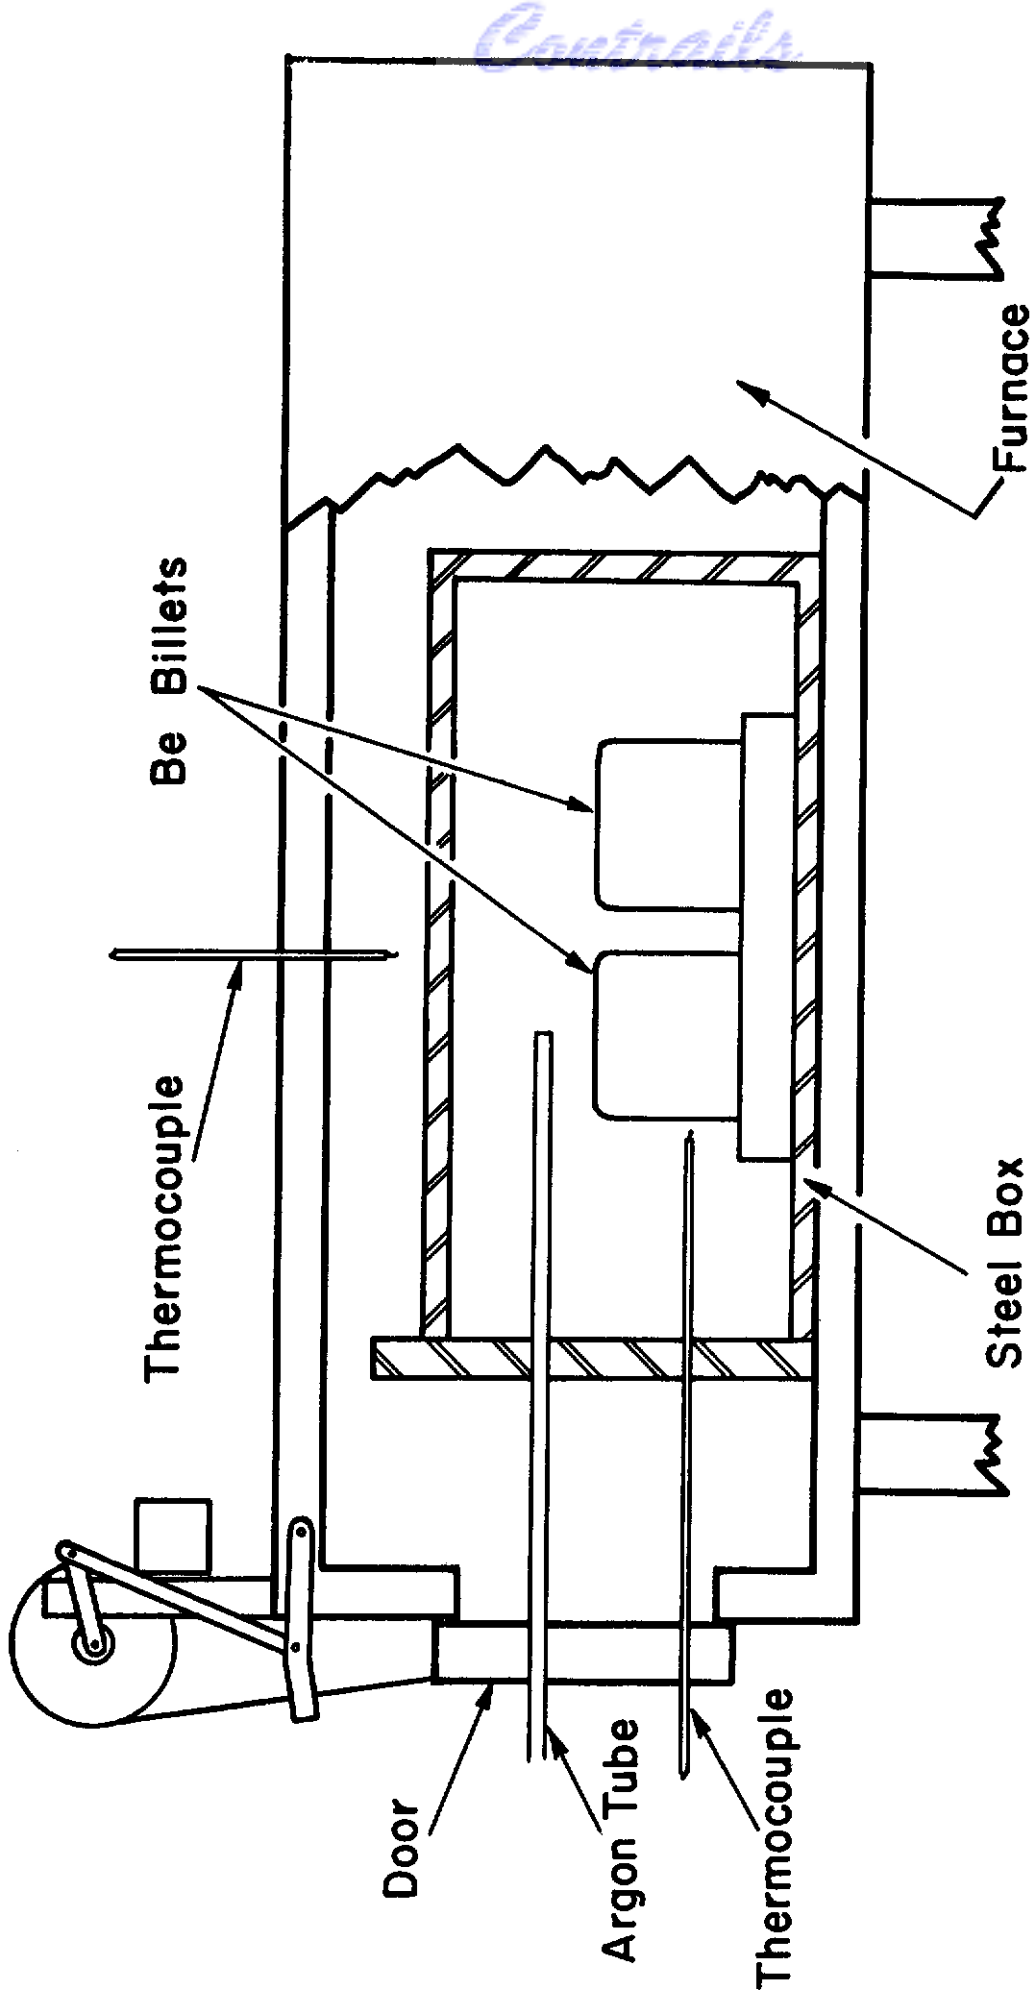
HEATING ARRANGEMENT FOR BERYLLIUM BILLETS.
